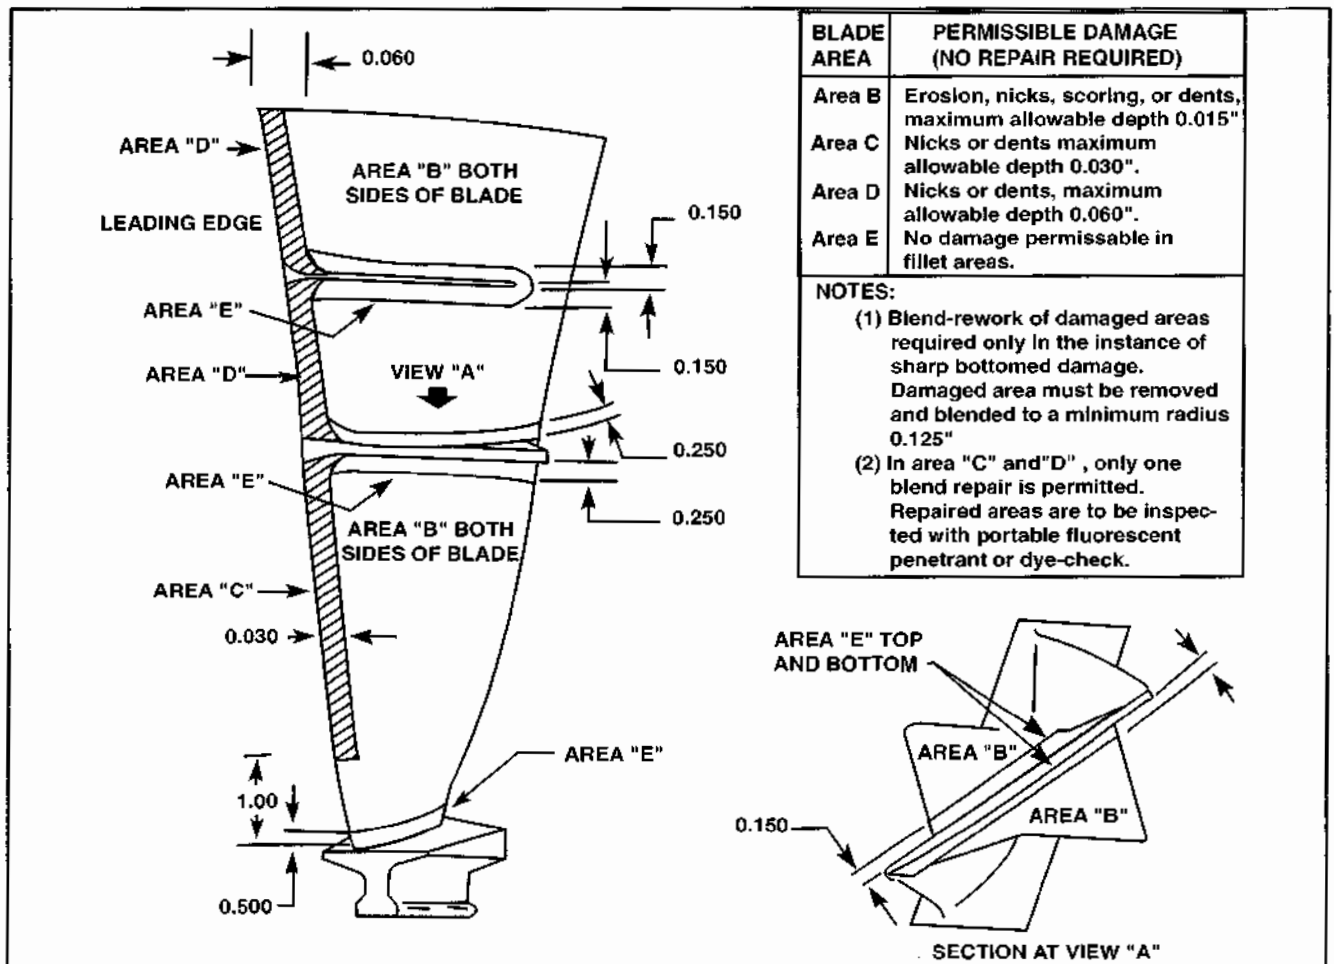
Light damage on a fan blade within permissible damage limits may be left unrepaired. No damage is permitted in fillet areas and cracks require replacement of a fan blade.
